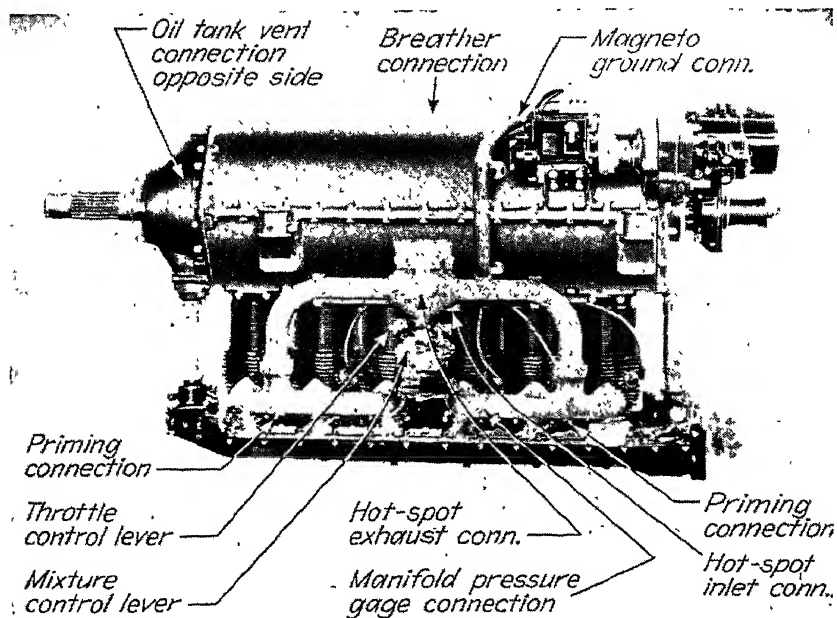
Side view of a Ranger 6-440 C engine. (Ranger Aircraft Engines.)
